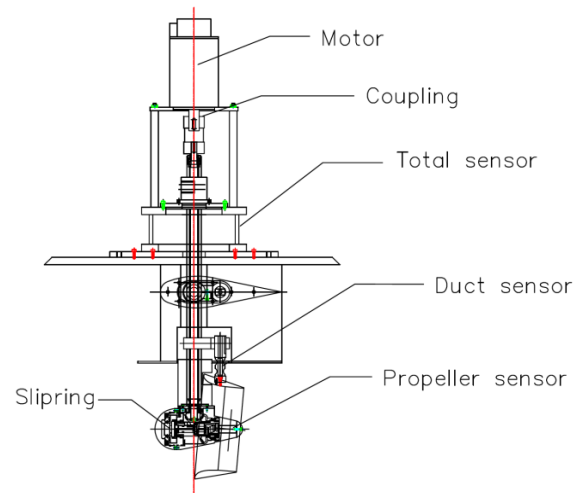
Full arrangement of the azimuth thruster dynamometer of bevel gear type
